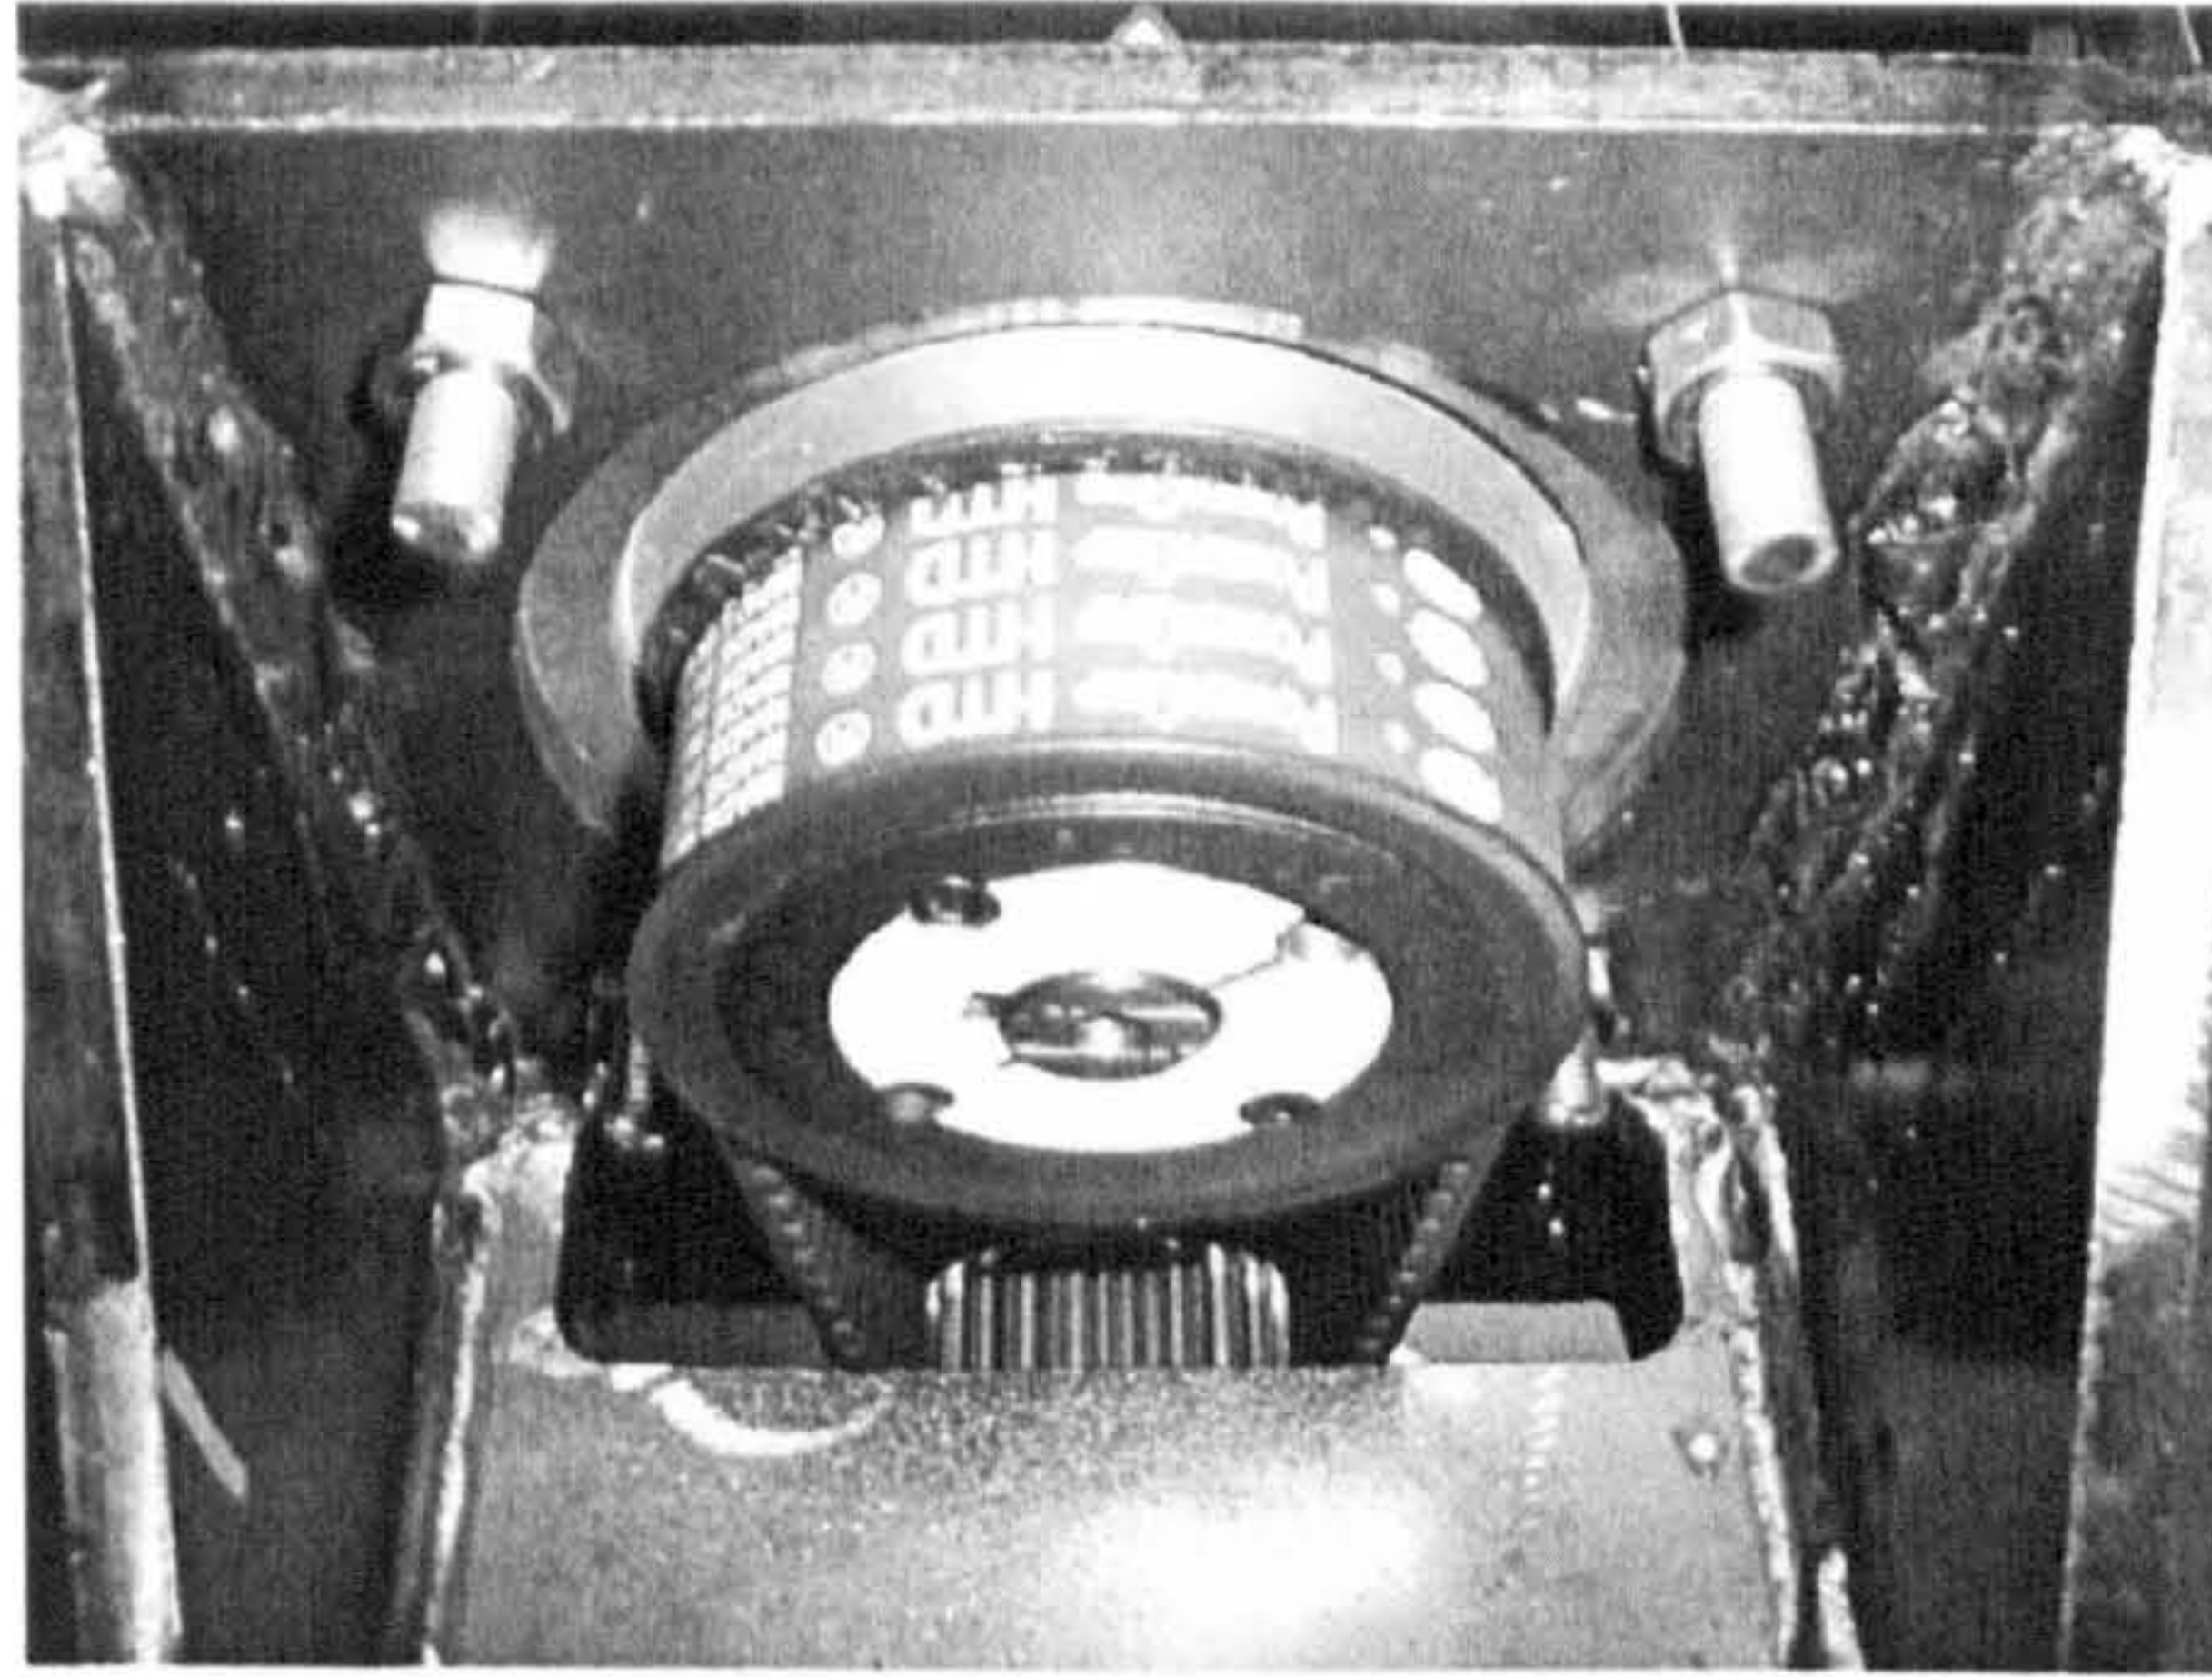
Shaft, support blocks and threaded shaft mounted on the upper assembly bar.
